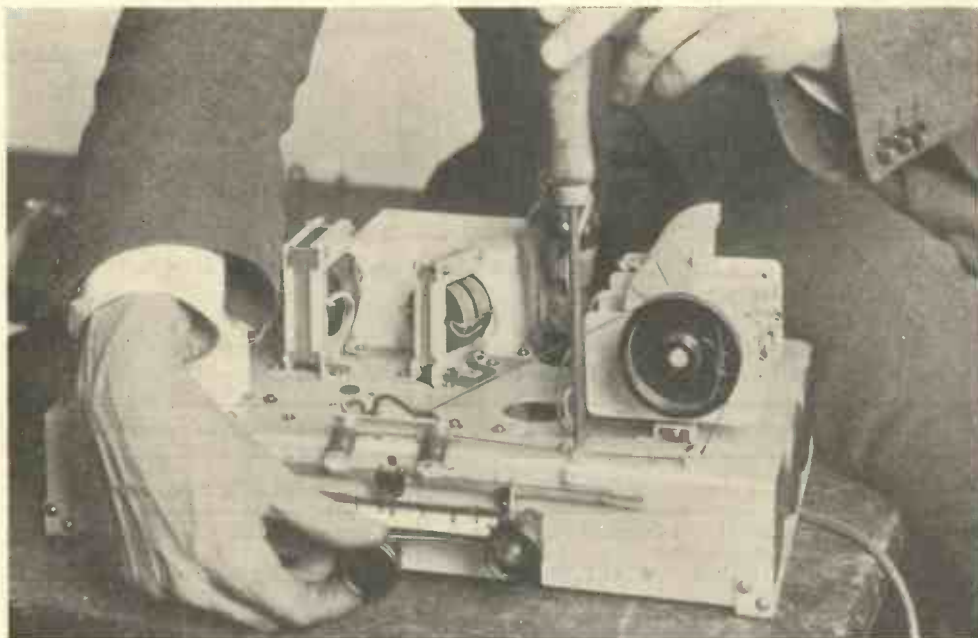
THIS SHOWS THE METHOD OF SETTING THE SCALE POINTER.
